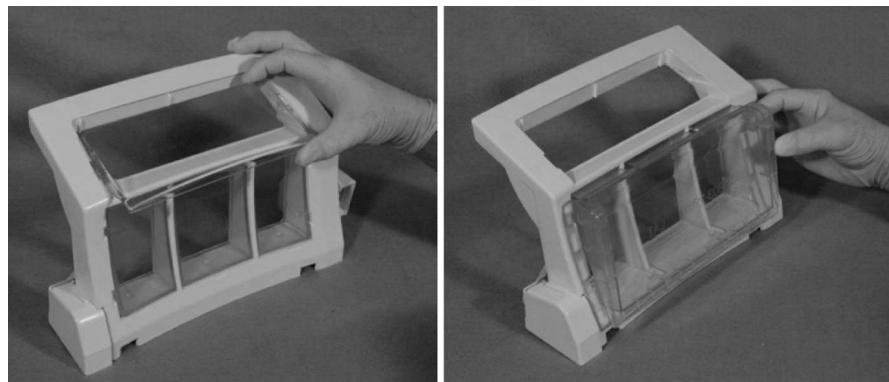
Lateral frame assembly: Left: Inserting lateral solid plate. Right: Inserting axilla solid plate.
